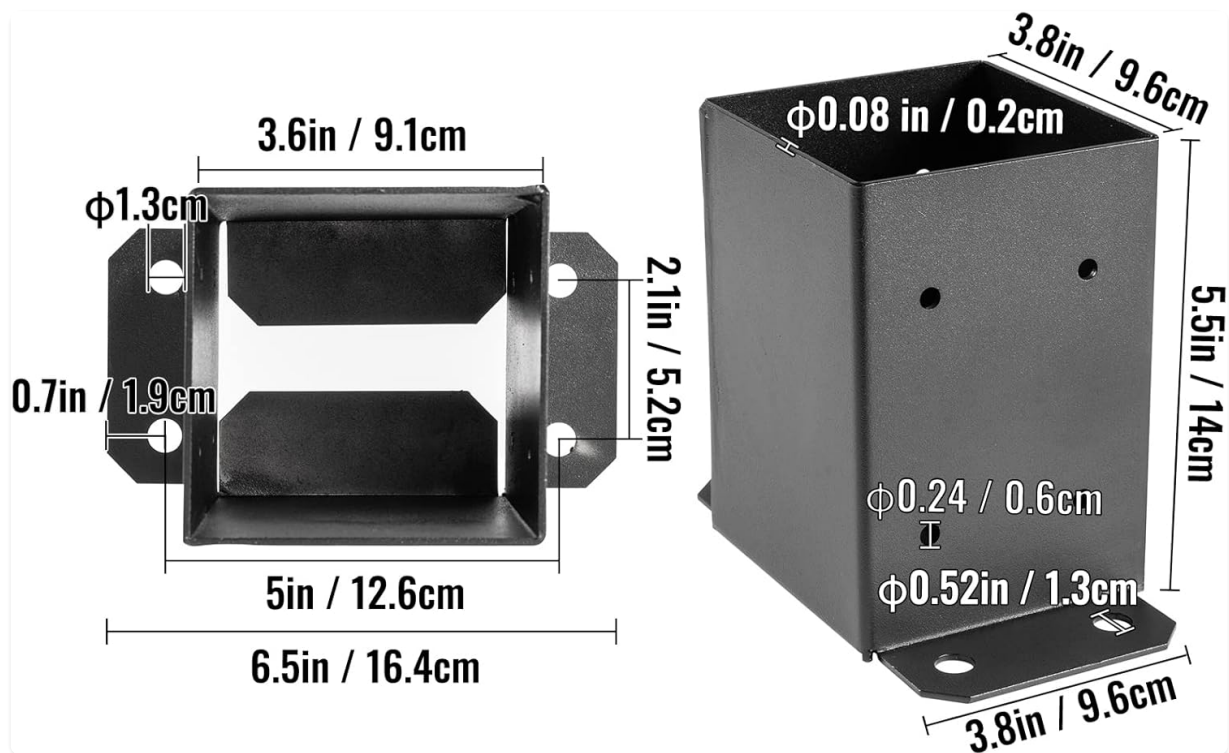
Detailed dimensional drawing of the post base, indicating key measurements for proper fit and installation.
